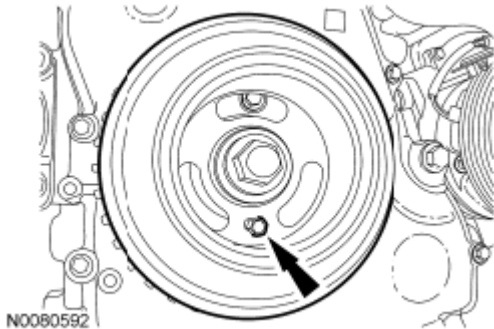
Locating Crankshaft Pulley Hole Bolt (6 mm x 18 mm)
